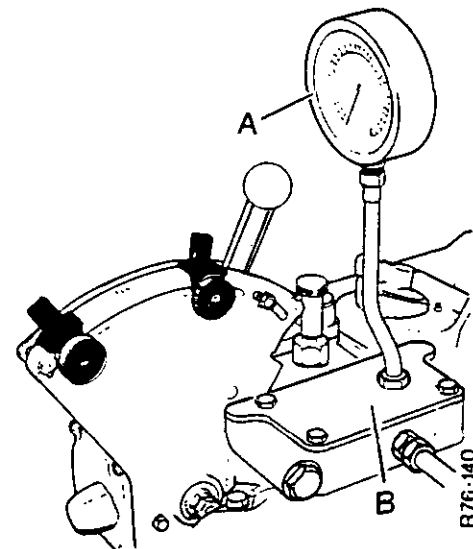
CHECKING THE PRESSURE OF THE OIL FROM THE PUMP
